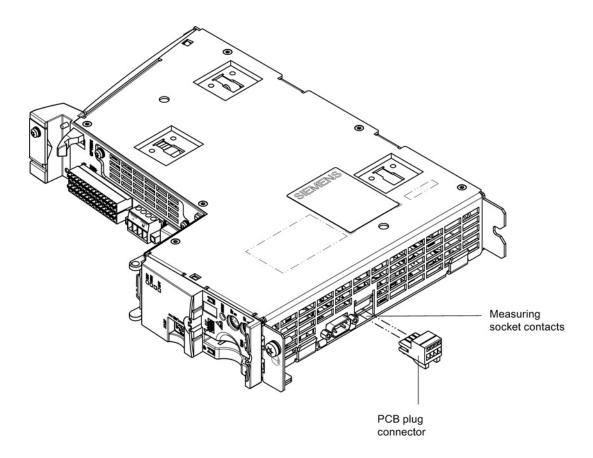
Installing a PCB plug connector (from Phoenix Contact) into the measuring socket contacts
